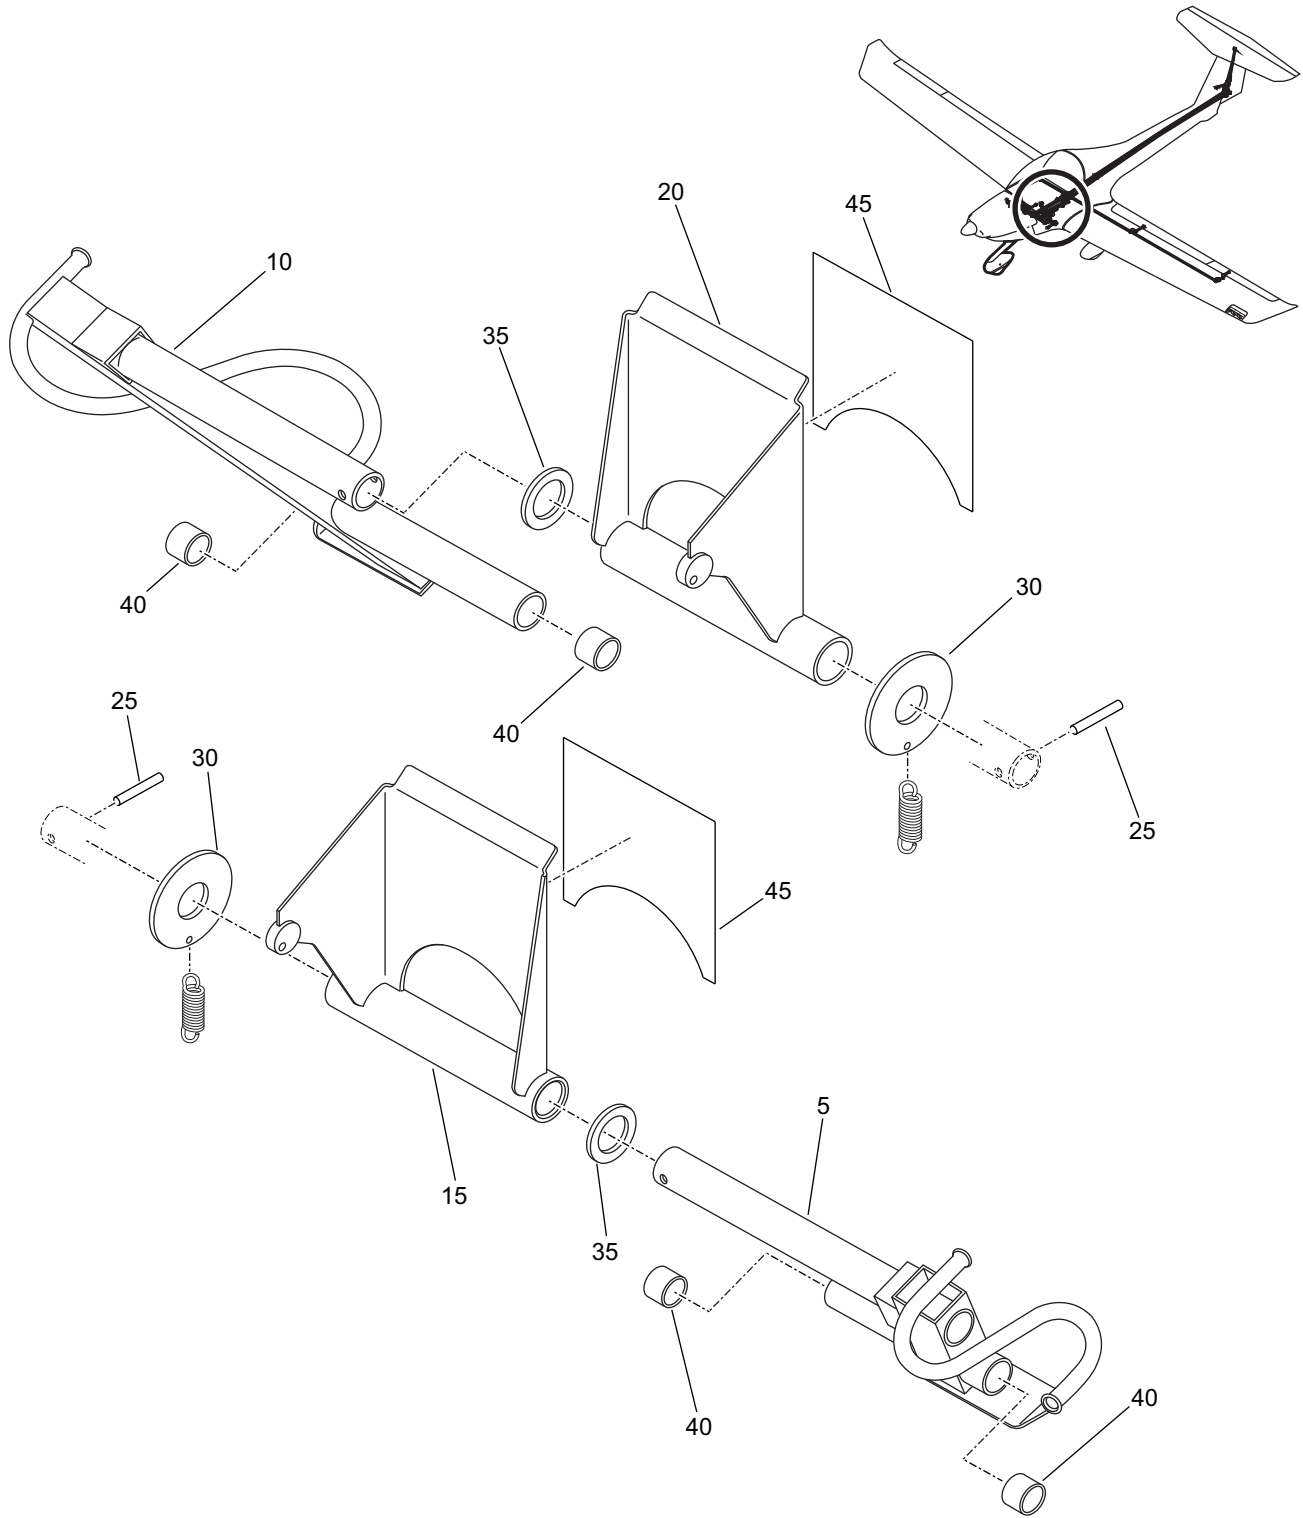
Rudder/Brake Pedal Assembly (LH/RH)
